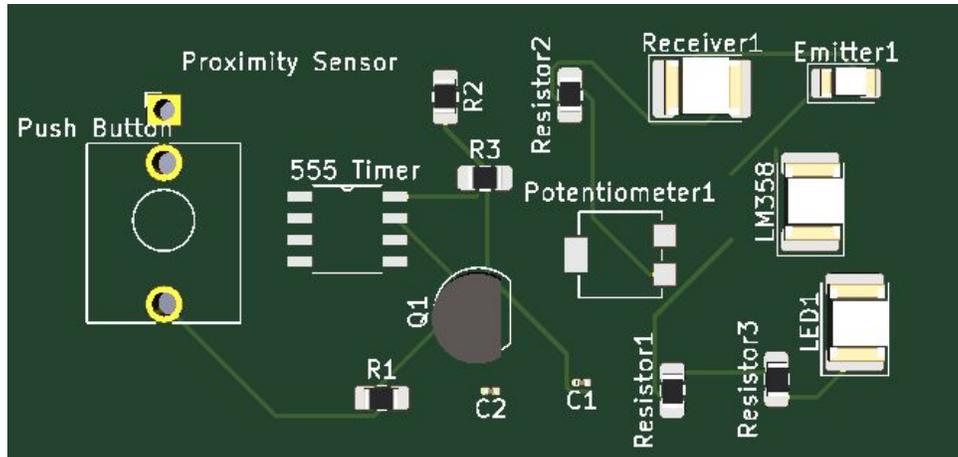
PCB of the Proximity Sensor Circuit(Final Component Placement Will Differ)
